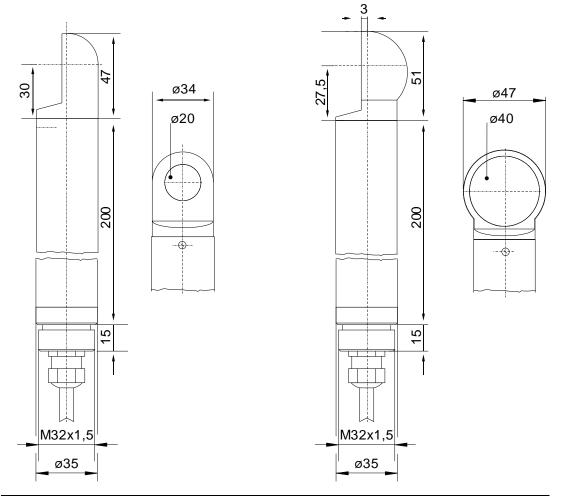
Dimensioned drawing rod sensor Type NOS-V200/V300 mit ø 20/40 mm
